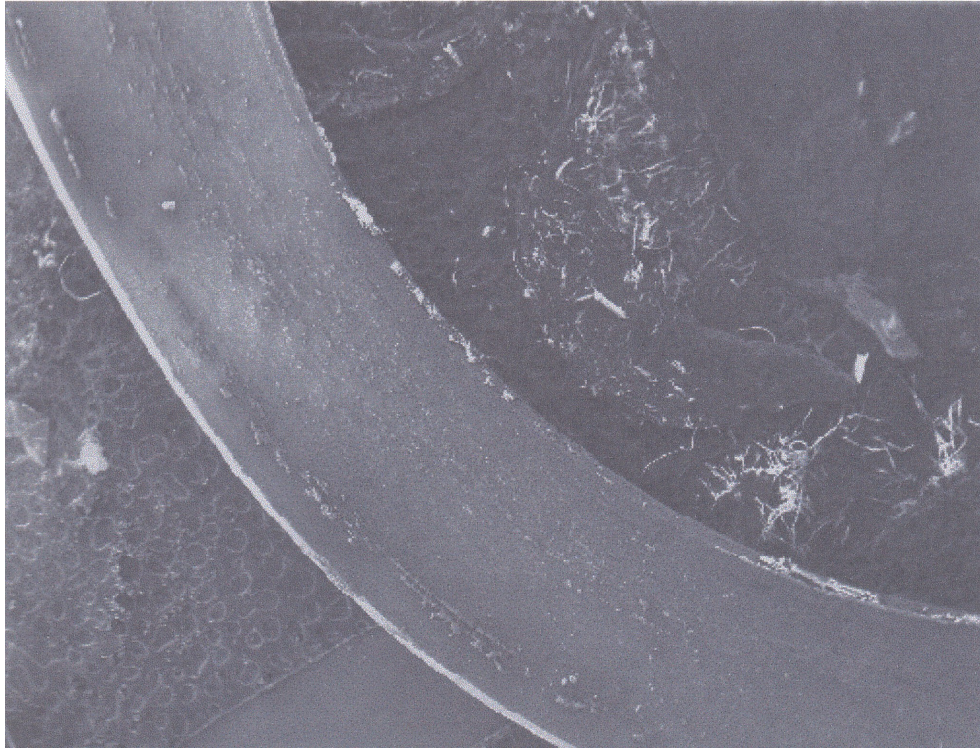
Photo of the Bottom End Aluminium Washer.
